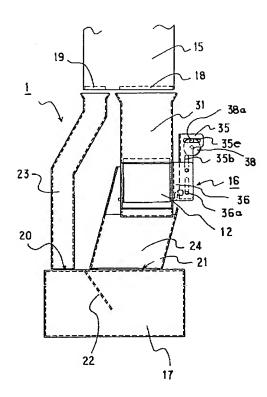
It is the front view of the automatic vending machine in which the embodiment of this invention is shown.
